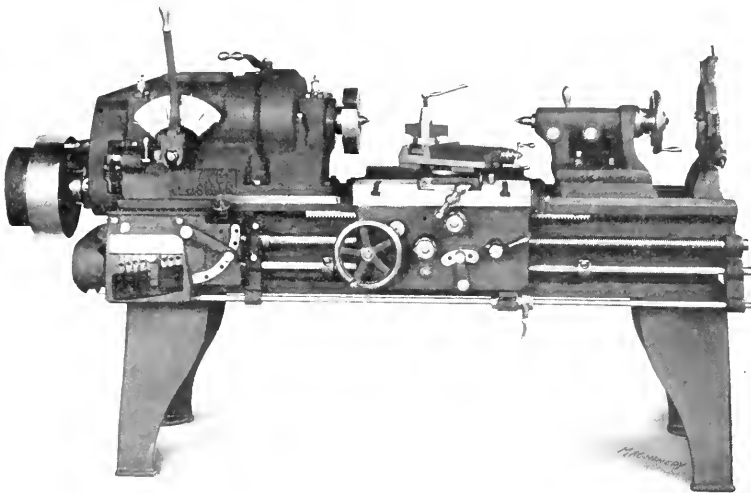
Greaves-Klusman 17-inch Quick-change Geared-head Lathe with Single Pulley Drive
